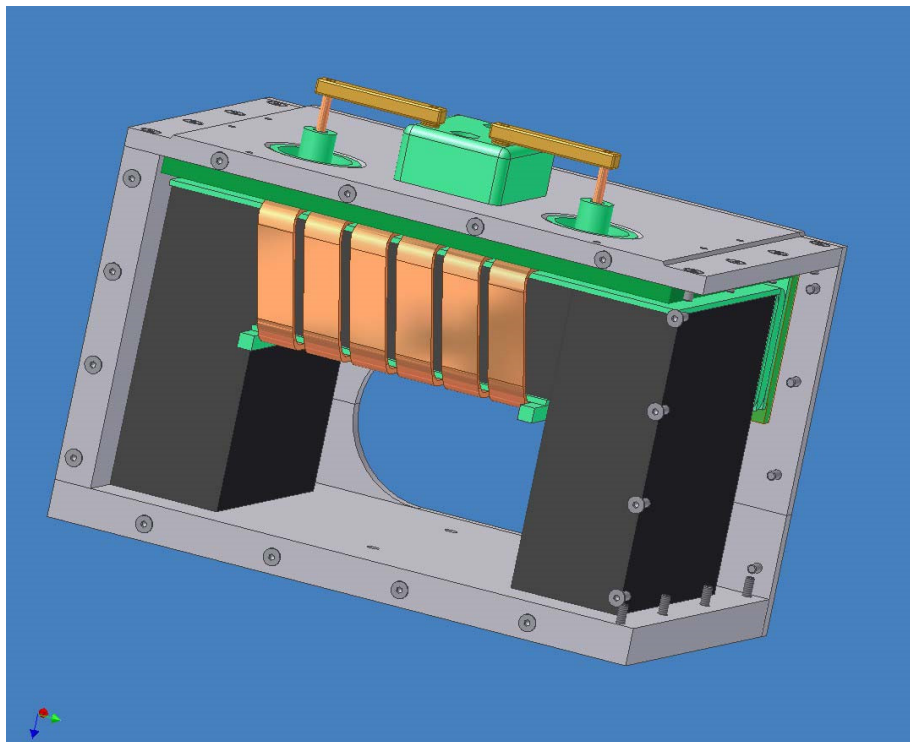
6-turns dump bumper start S3-010A-BDS, front and side covers removed.
